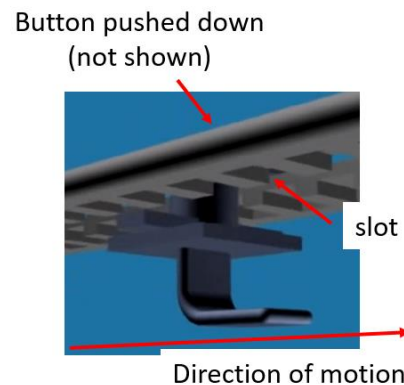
Future button design idea for linear motion and “catching” mechanism.
